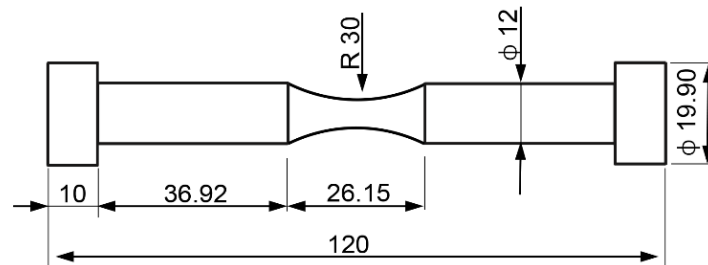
Shape of fatigue specimen (dimensions in mm) [45].
